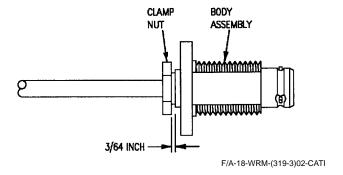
M25516-19-02-04, M25516-19-03-04 and M25516-19-10-04 Coax Connector Repair (Sheet 3)
